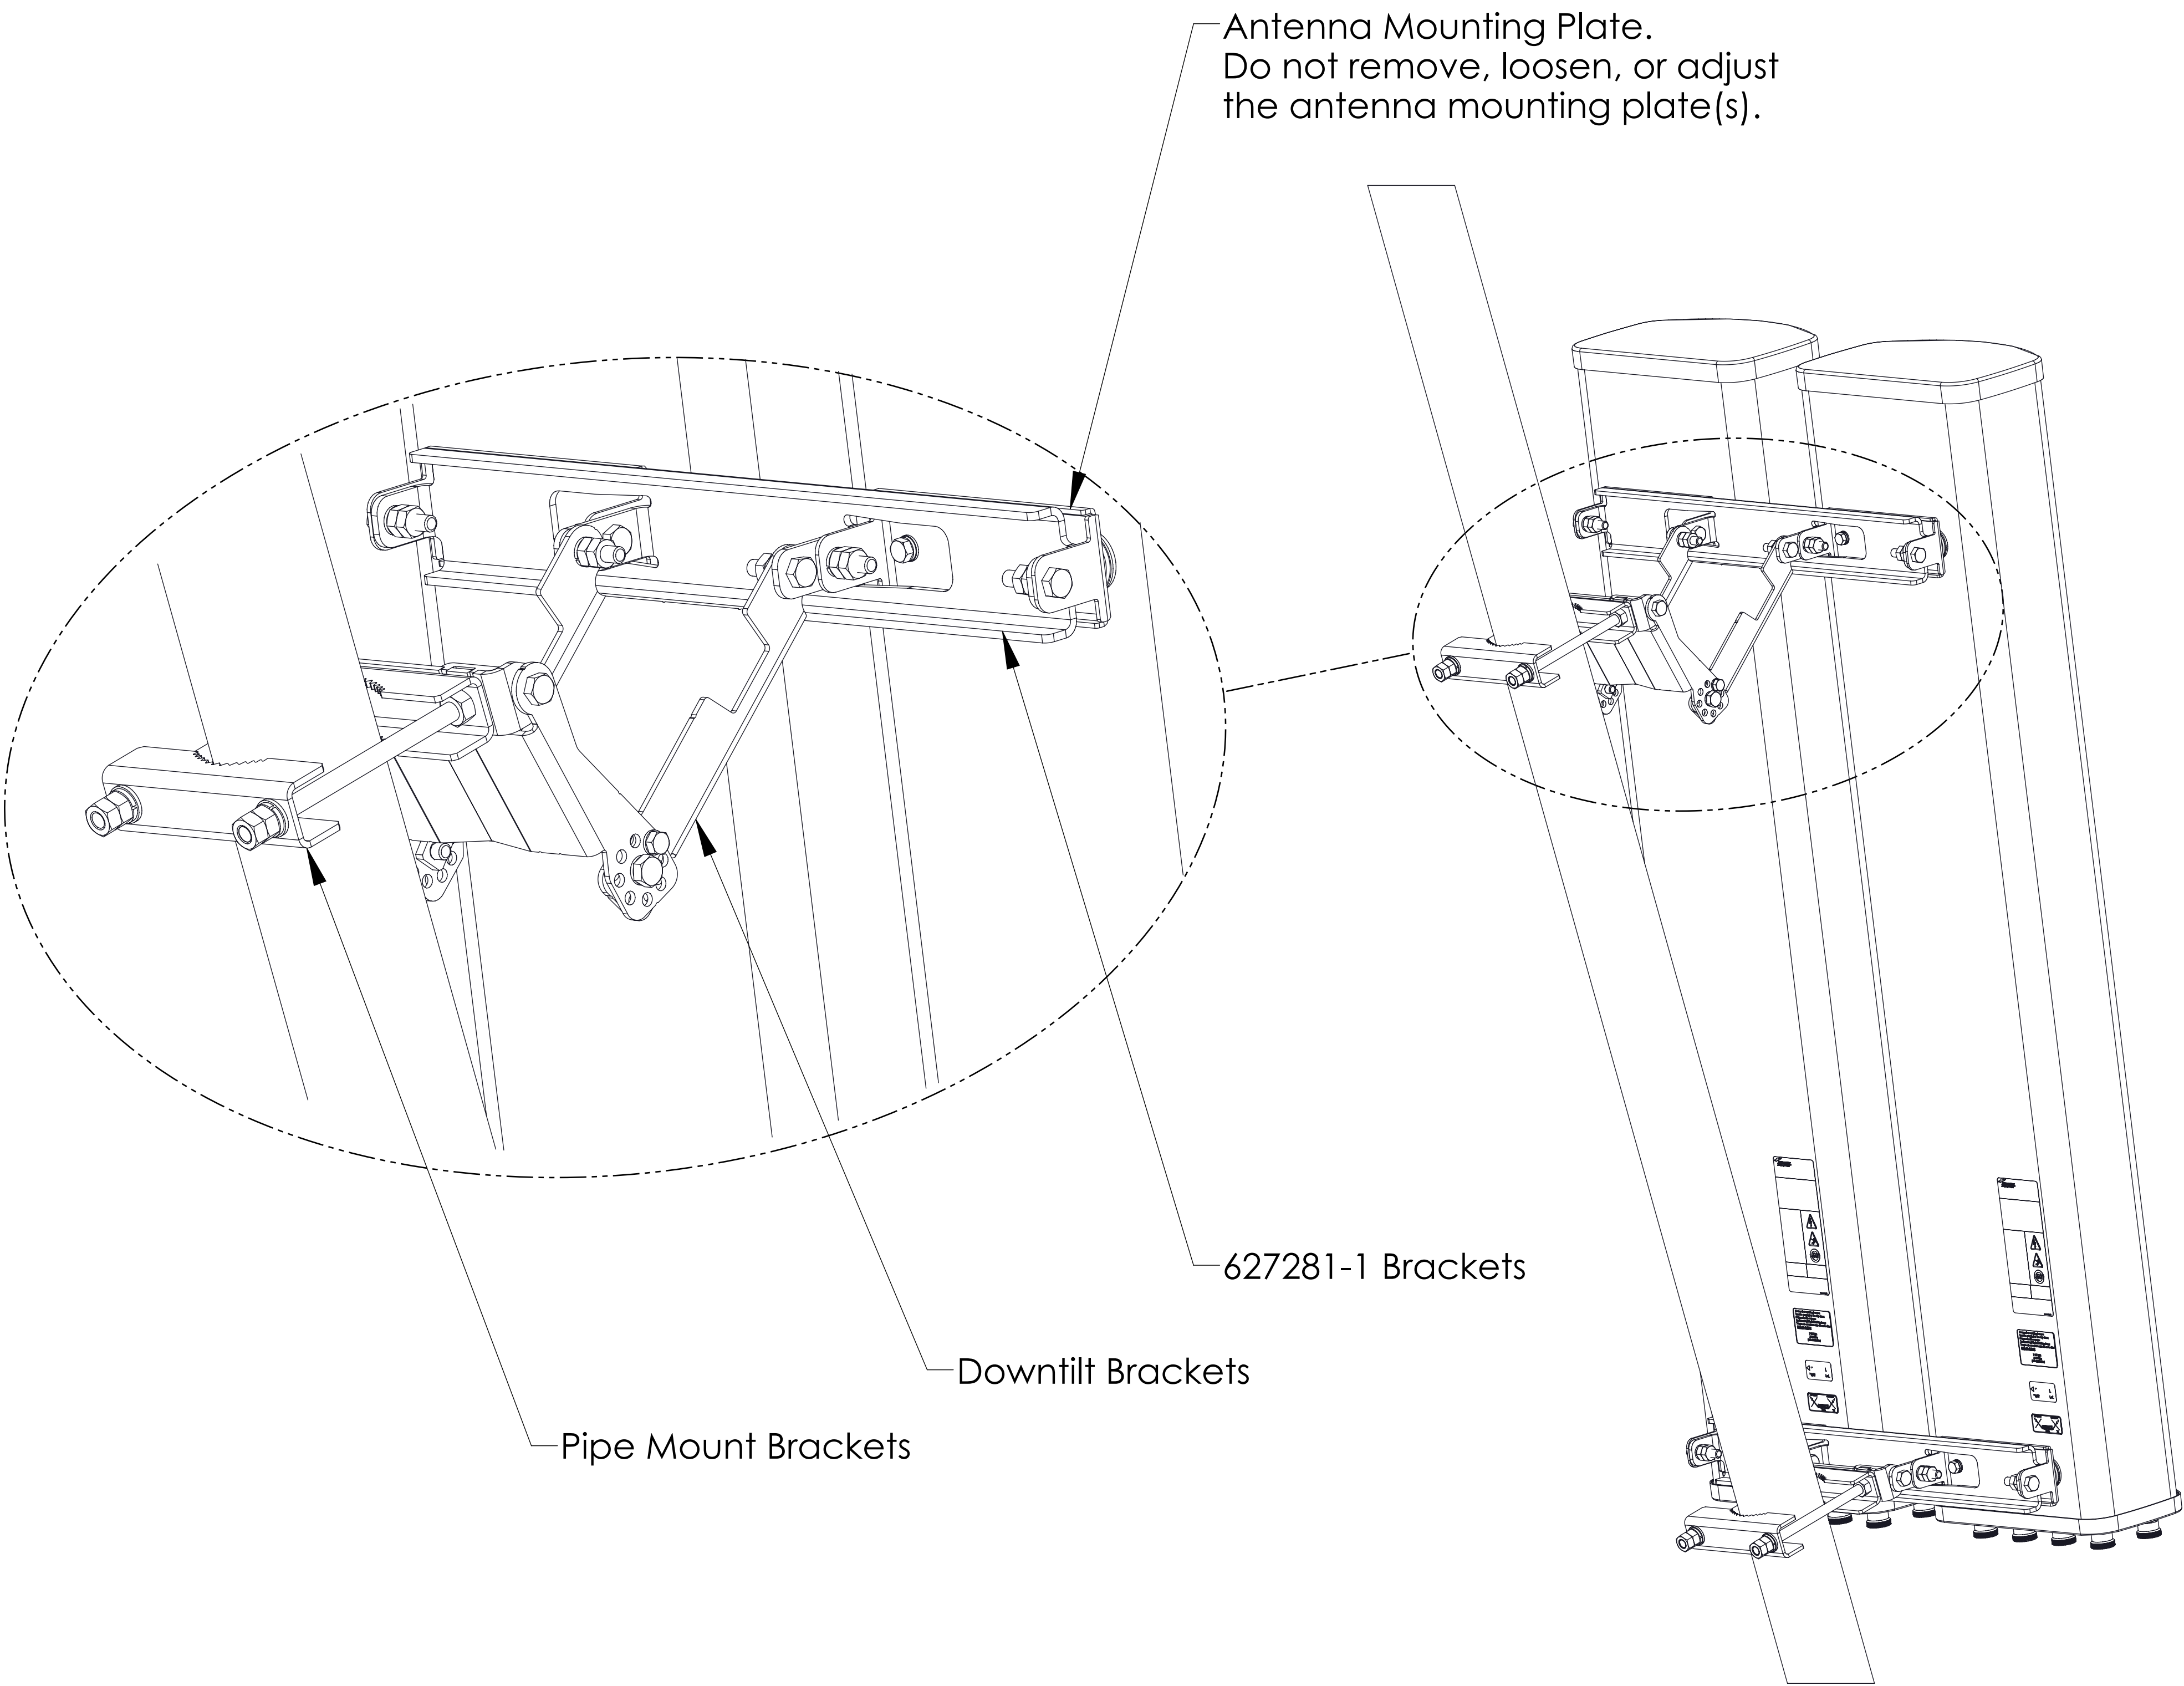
Antenna Assembly Attached to Mast Using BSAMNT-SBS-1-2 Mounting Kits.
